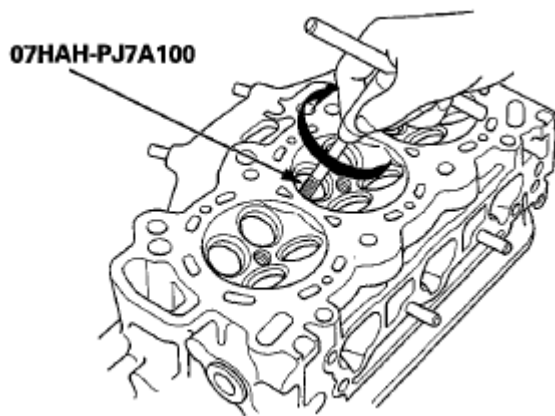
Grinding Valve Guide Seat With Valve Guide Reamer
